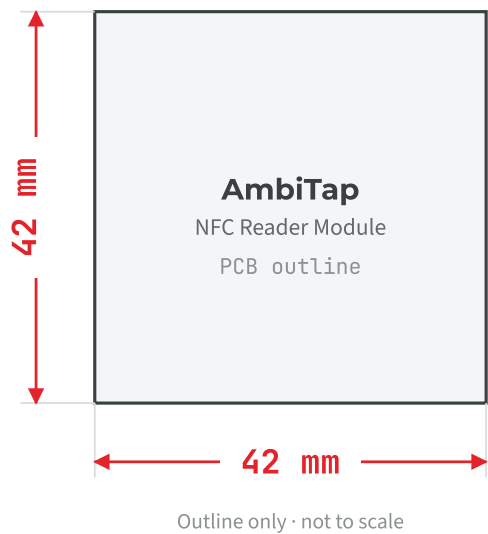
PCB outline. Component placement, connector positions, keep-out areas and mounting features are not shown and are not implied by this drawing.
